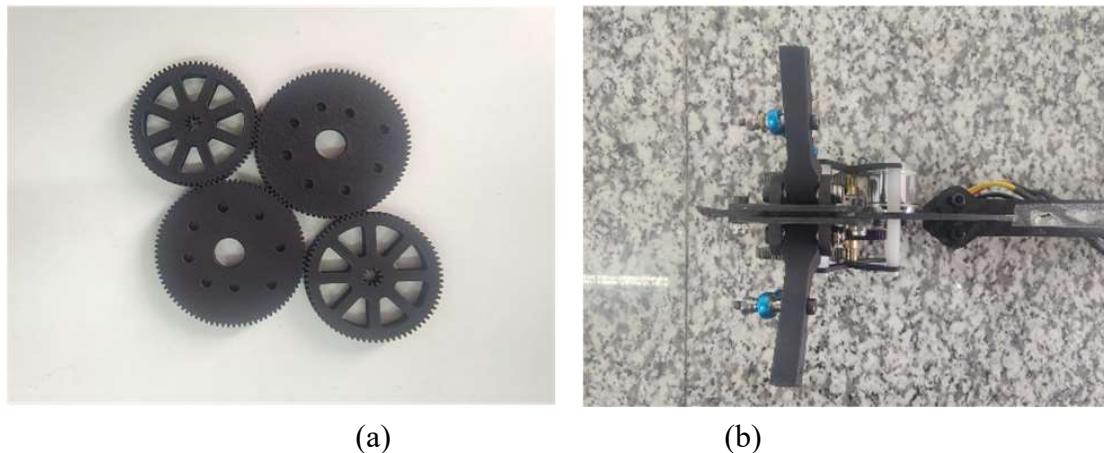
Seagull bionic ornithopter transmission mechanism physical drawing
